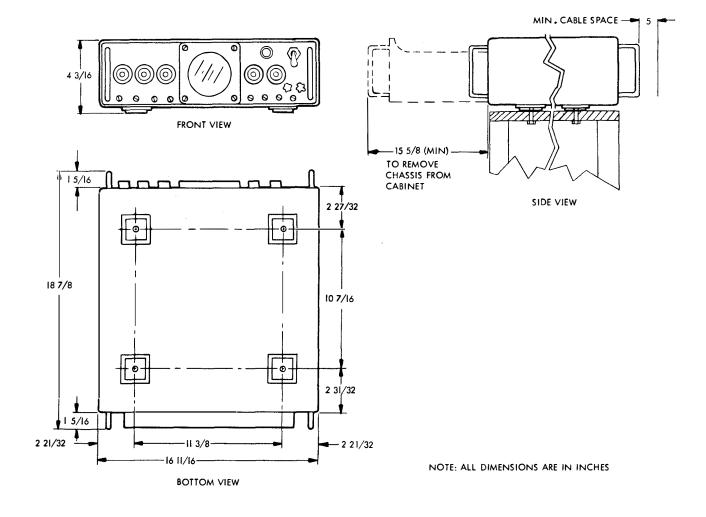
Frequency Shift Converter CV-483C/URA-17, Table-Mounting Installation Drawing
